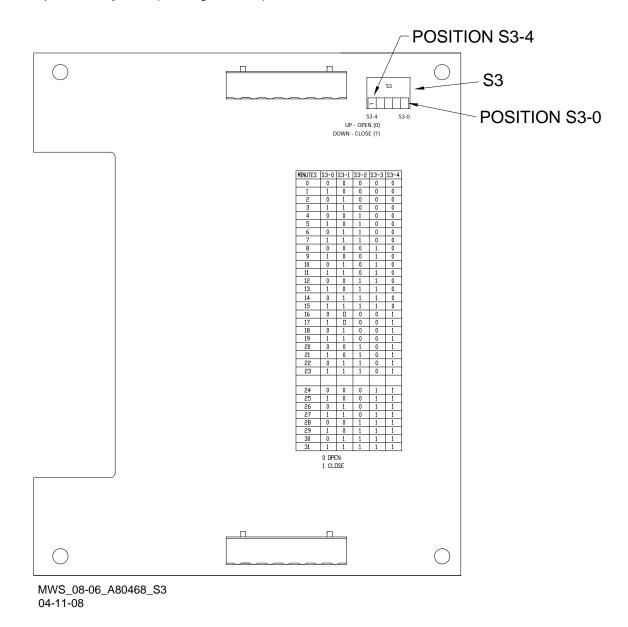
Transfer Module Assembly, A80468, S3 Switch Position
